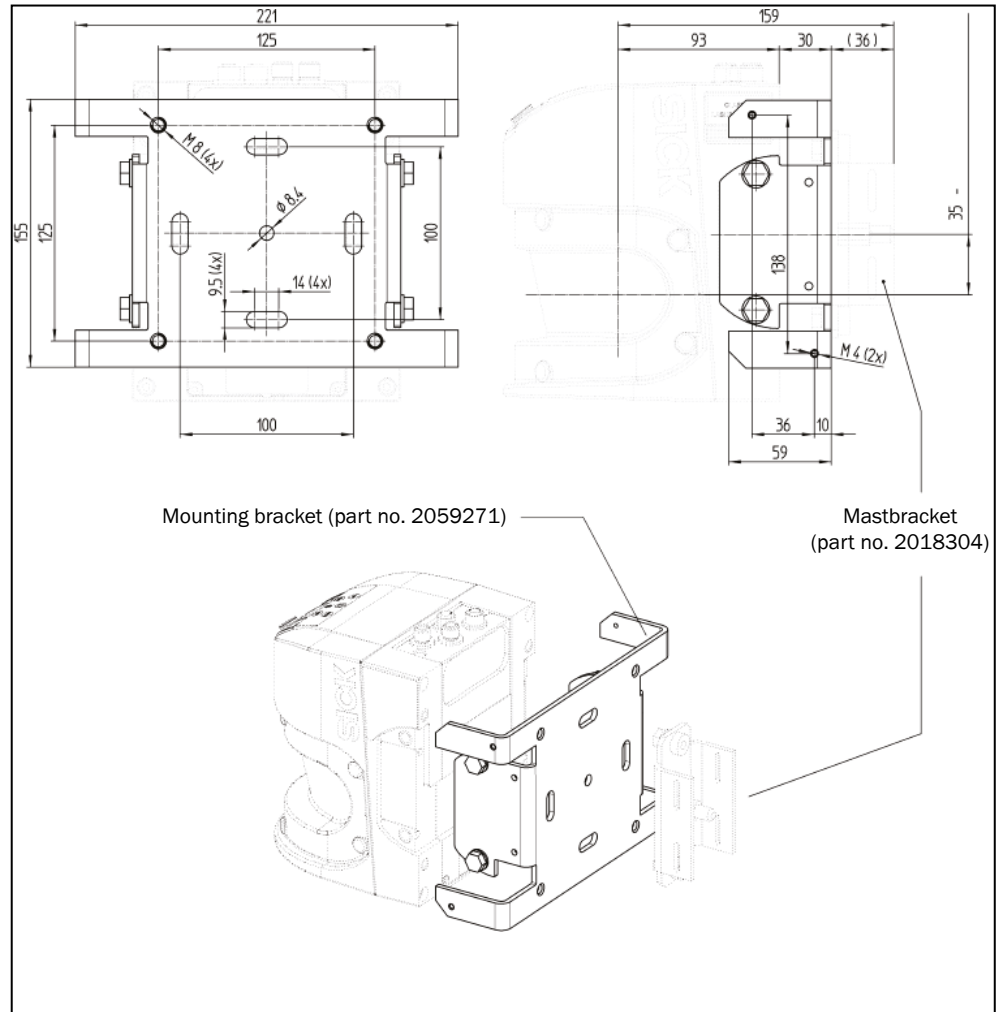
Dimensional drawing mounting bracket for existing LMS2xx mounting kit (mm)
